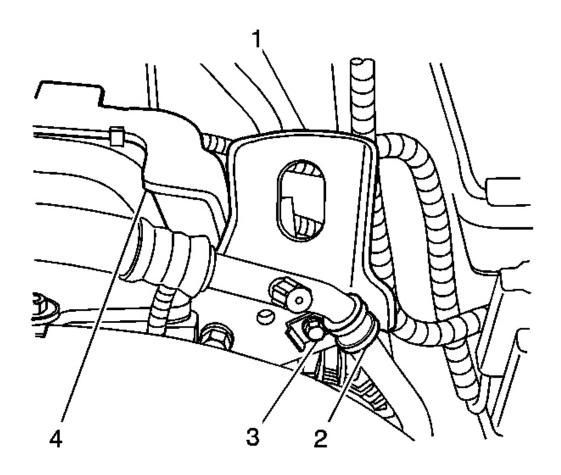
View Of Engine Lift Bracket & Attachments Courtesy of GENERAL MOTORS CORP.
